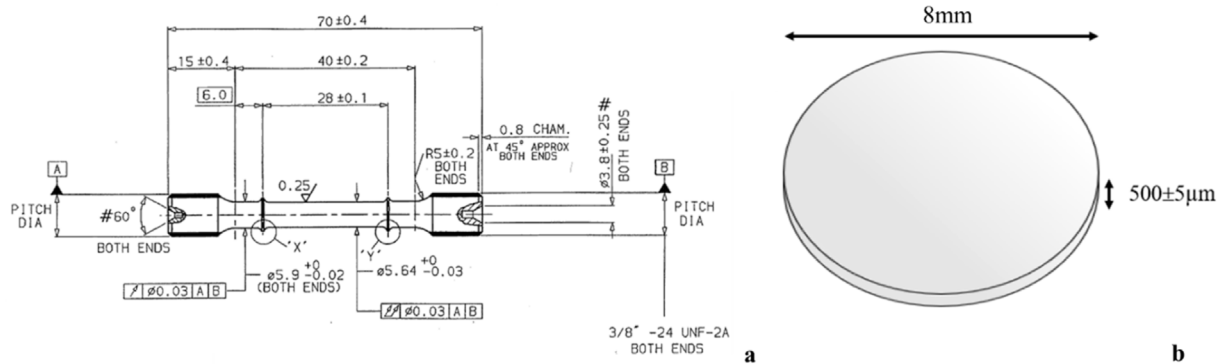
Test piece geometry for (a) Uniaxial tensile and (b) Small punch and shear punch testing.
